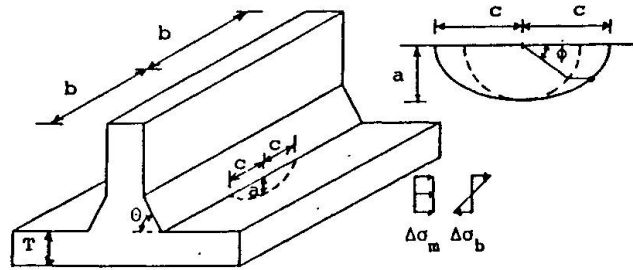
Semi-elliptical crack at the weld toe.
